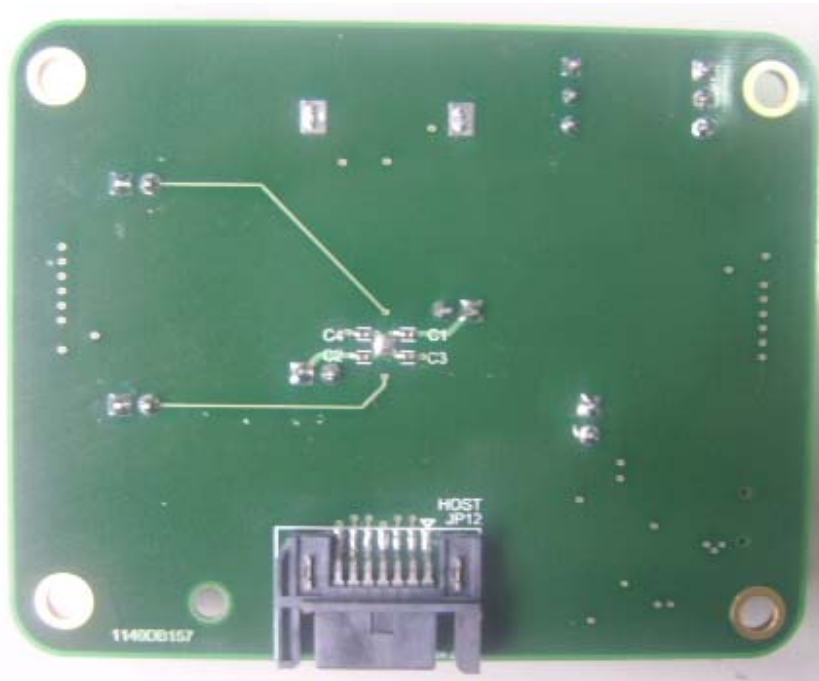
Bottom view of PI3EQX6801ZDE Eval board Rev.A
